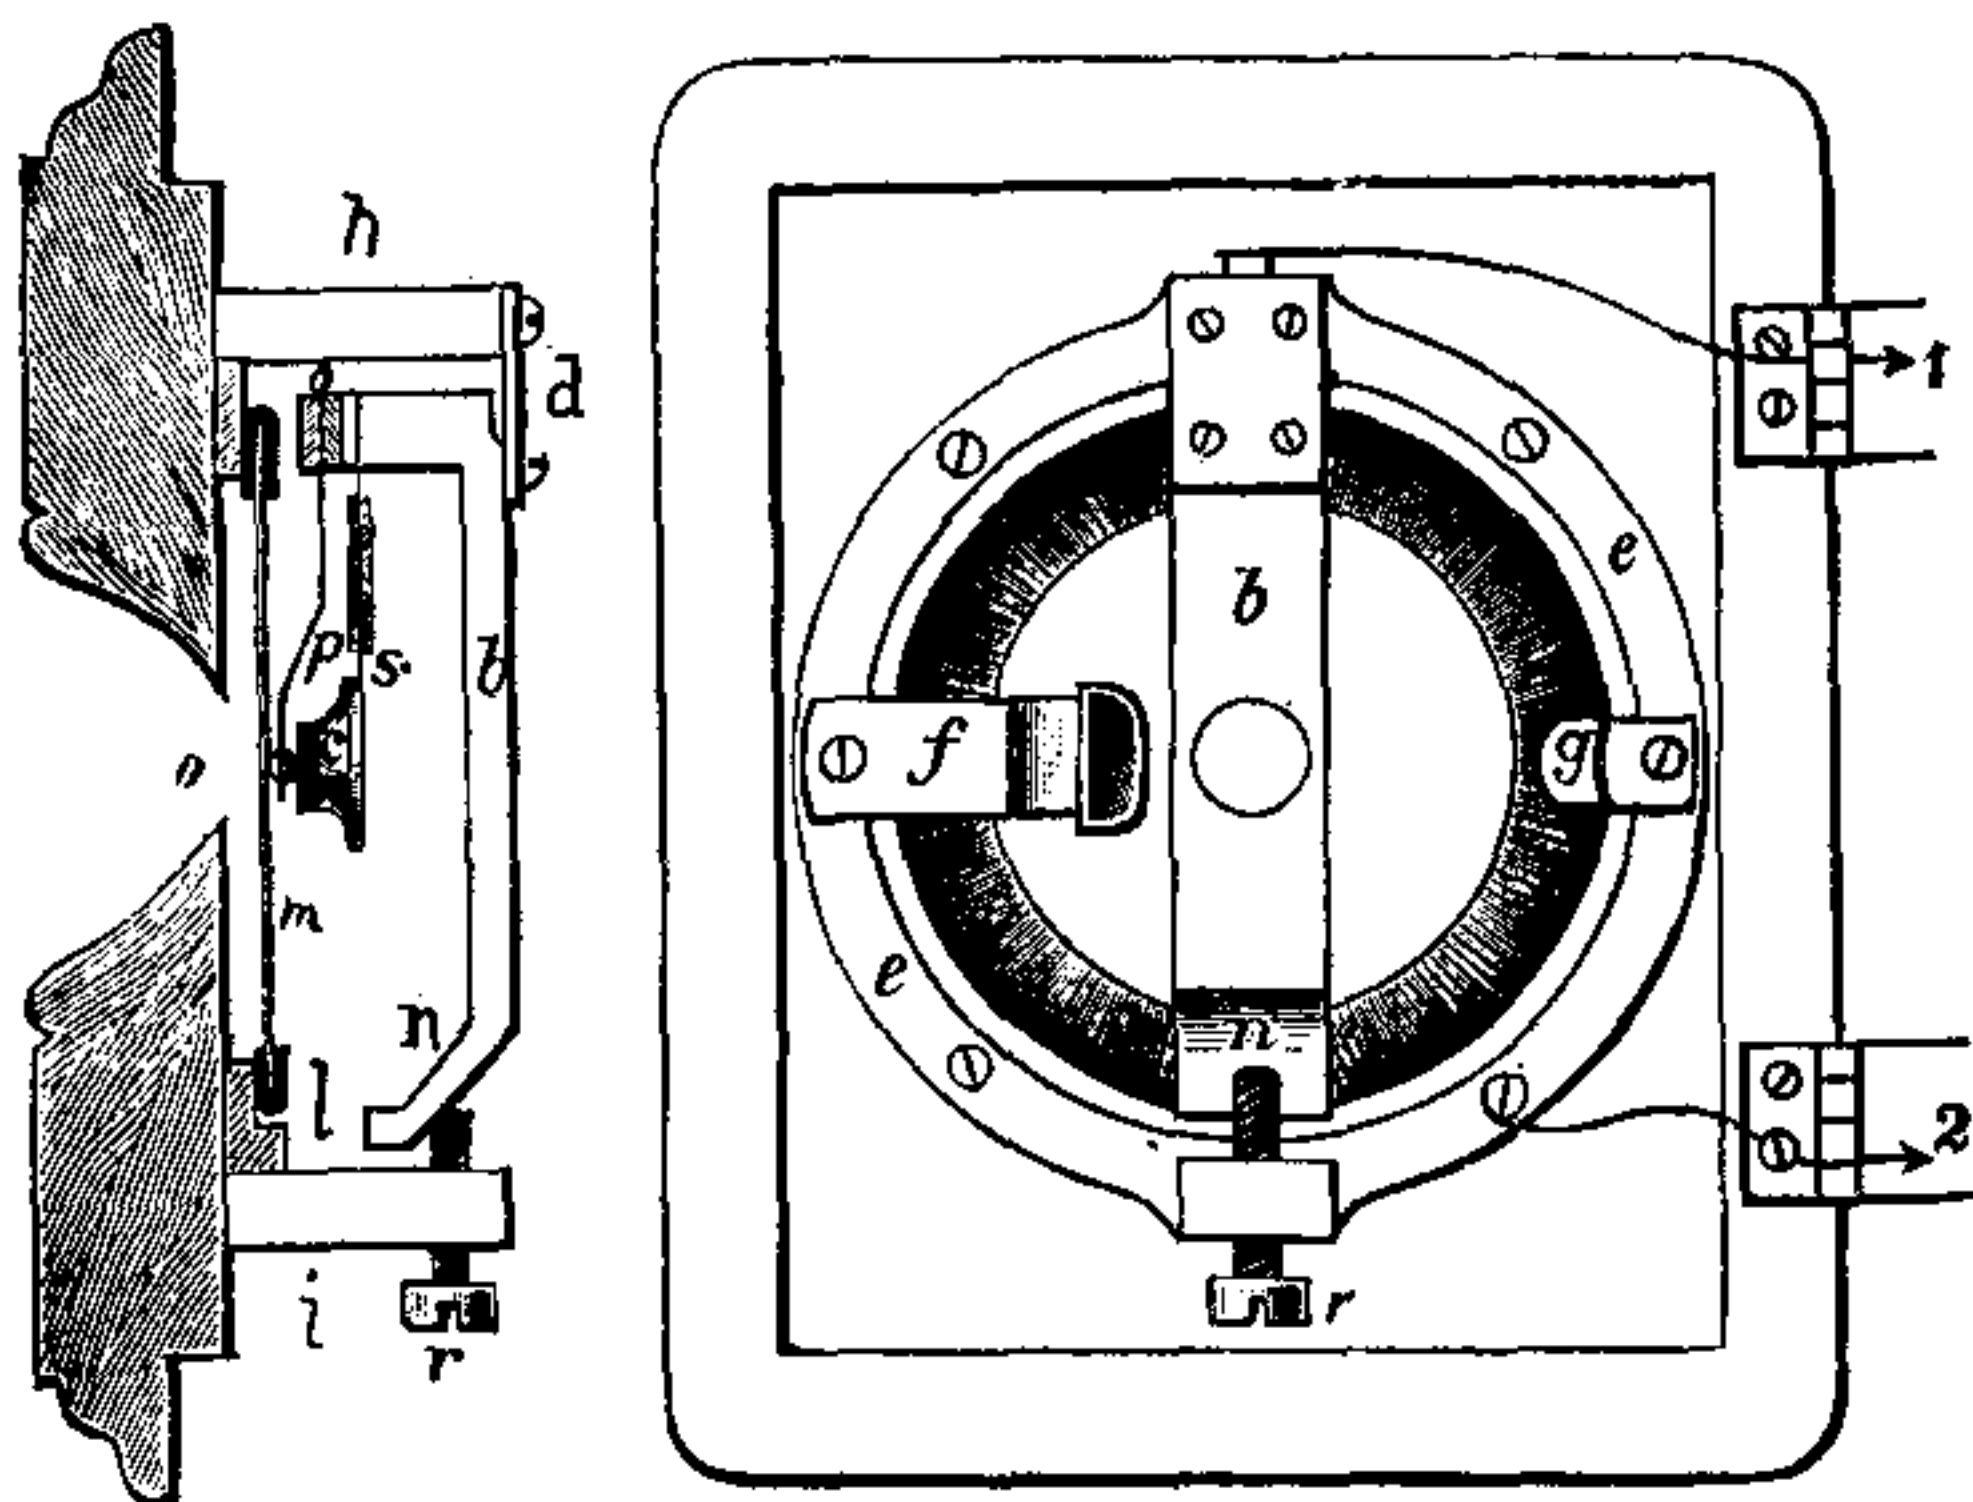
BLAKE TRANSMITTER, SECTION AND ELEVATION.
